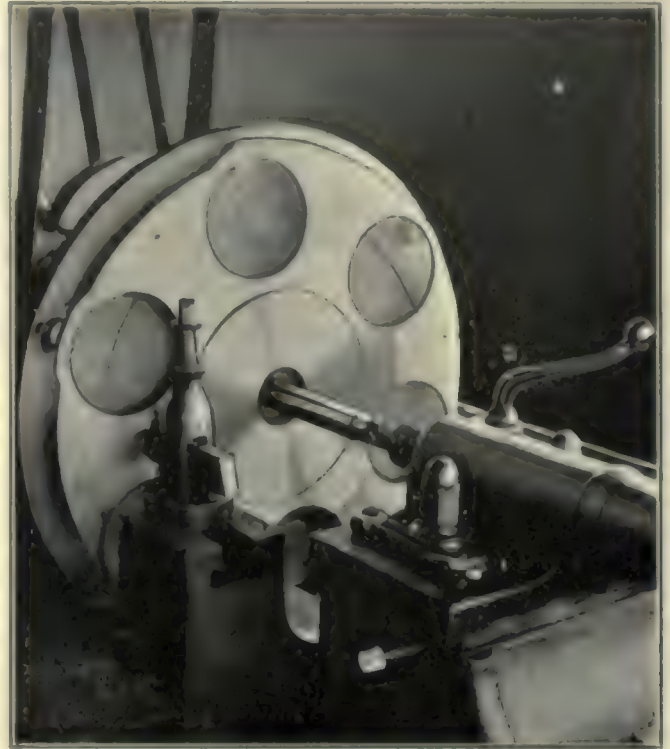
THE DISK MOUNTED IN THE LATHE FOR FACING
